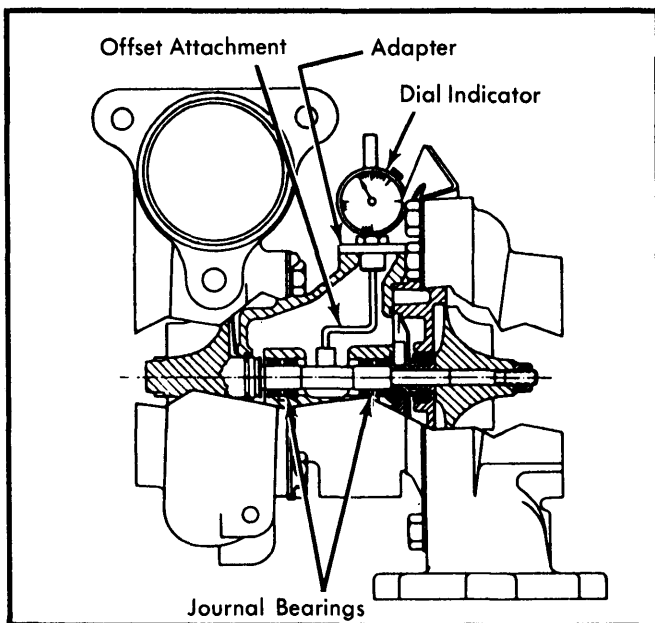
Checking Journal Bearing Clearance With Dial Indicator
